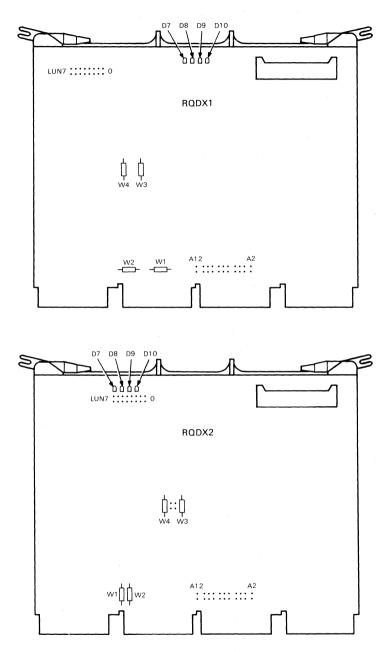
RQDX1 and RQDX2 Module Layouts
